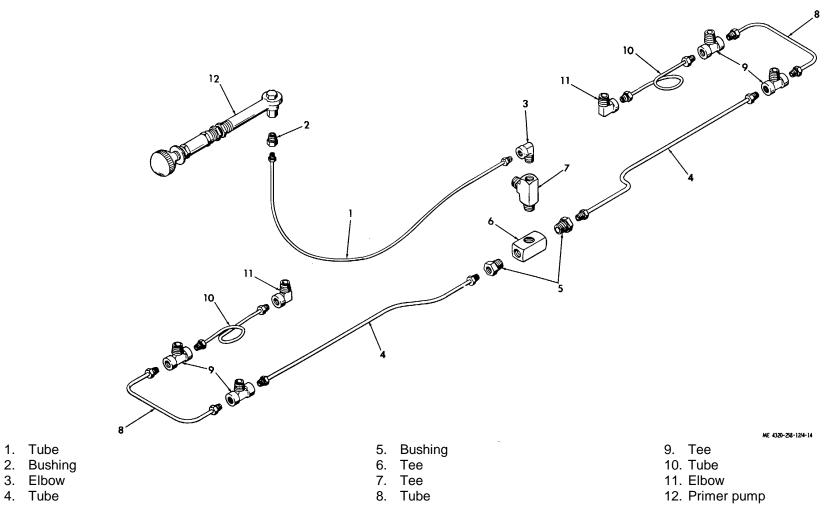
Primer pump, lines, and fittings, exploded view.
